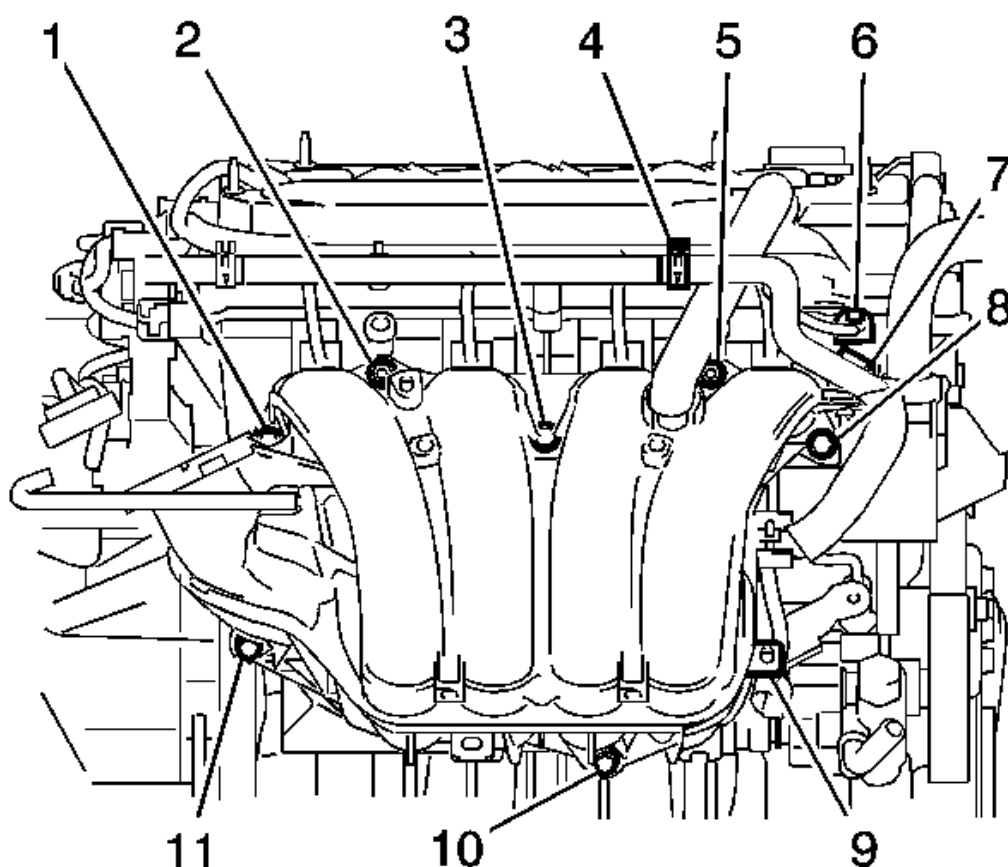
View Of Intake Manifold, Bolts & Nuts
